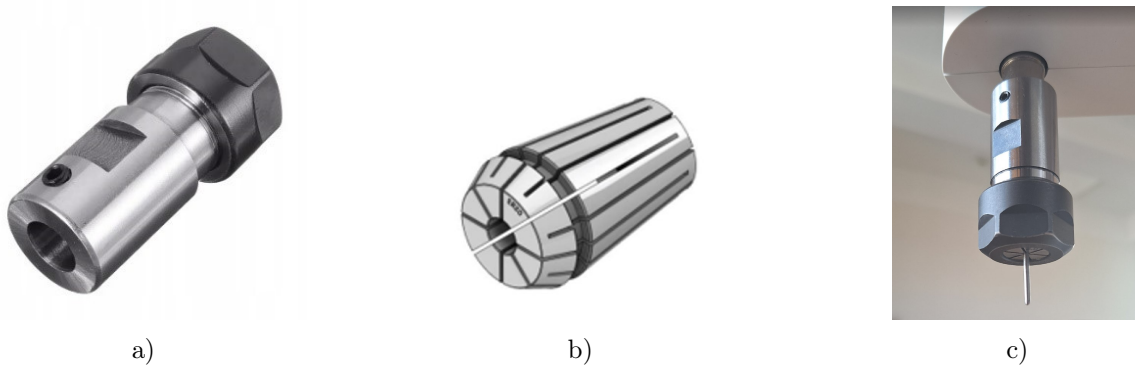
Forming tool holder compatible with robotic arm: a) robot-collet connection b) collet c) mandrel fixed in collet.
